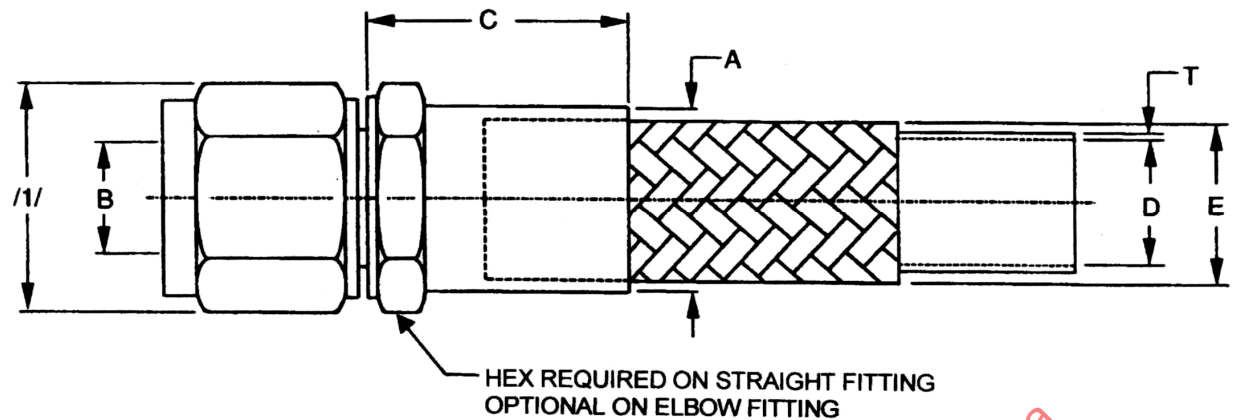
HOSE AND FITTING DIMENSIONS
